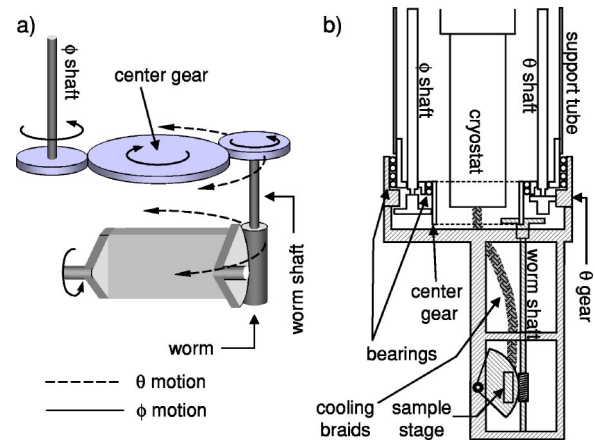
(a) The role of the center gear. The worm shaft rotates with the manipulator upon the θ motion. However, its spur gear remains engaged with the center gear through which the torque is transferred. (b) Schematic of the manipulator head. Hatched parts which include the worm shaft undergo θ rotation.
